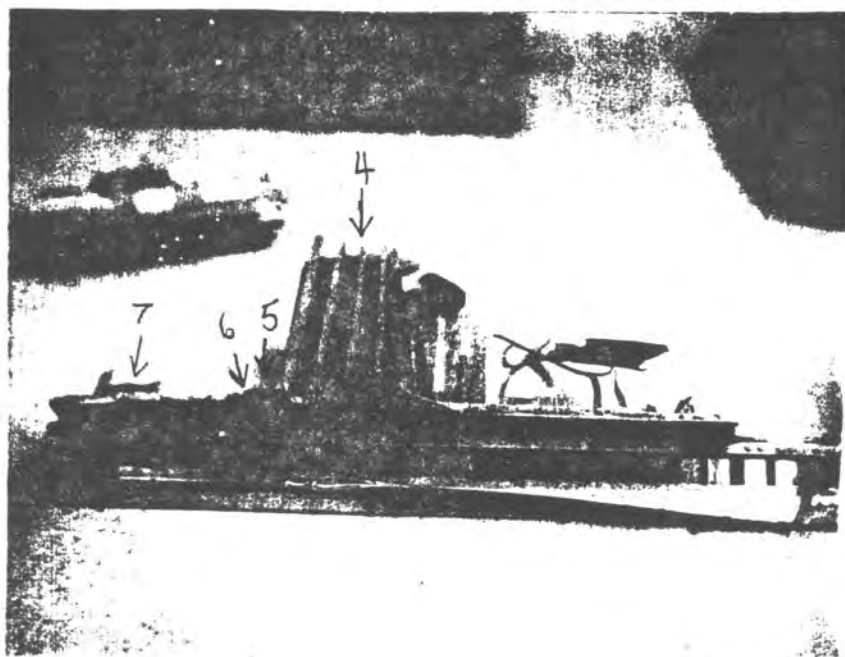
Aft ramp section (4-3) identifies location of samples 4, 5, 6 and 7.
